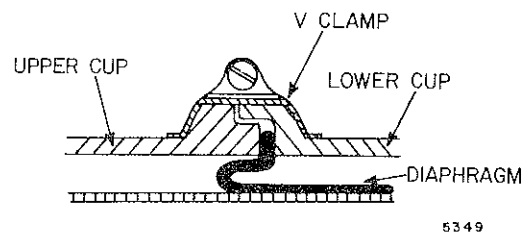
Operator Body Assembly, MP904A Series 4 and 5, MP904B Series 3, and MP904C.
